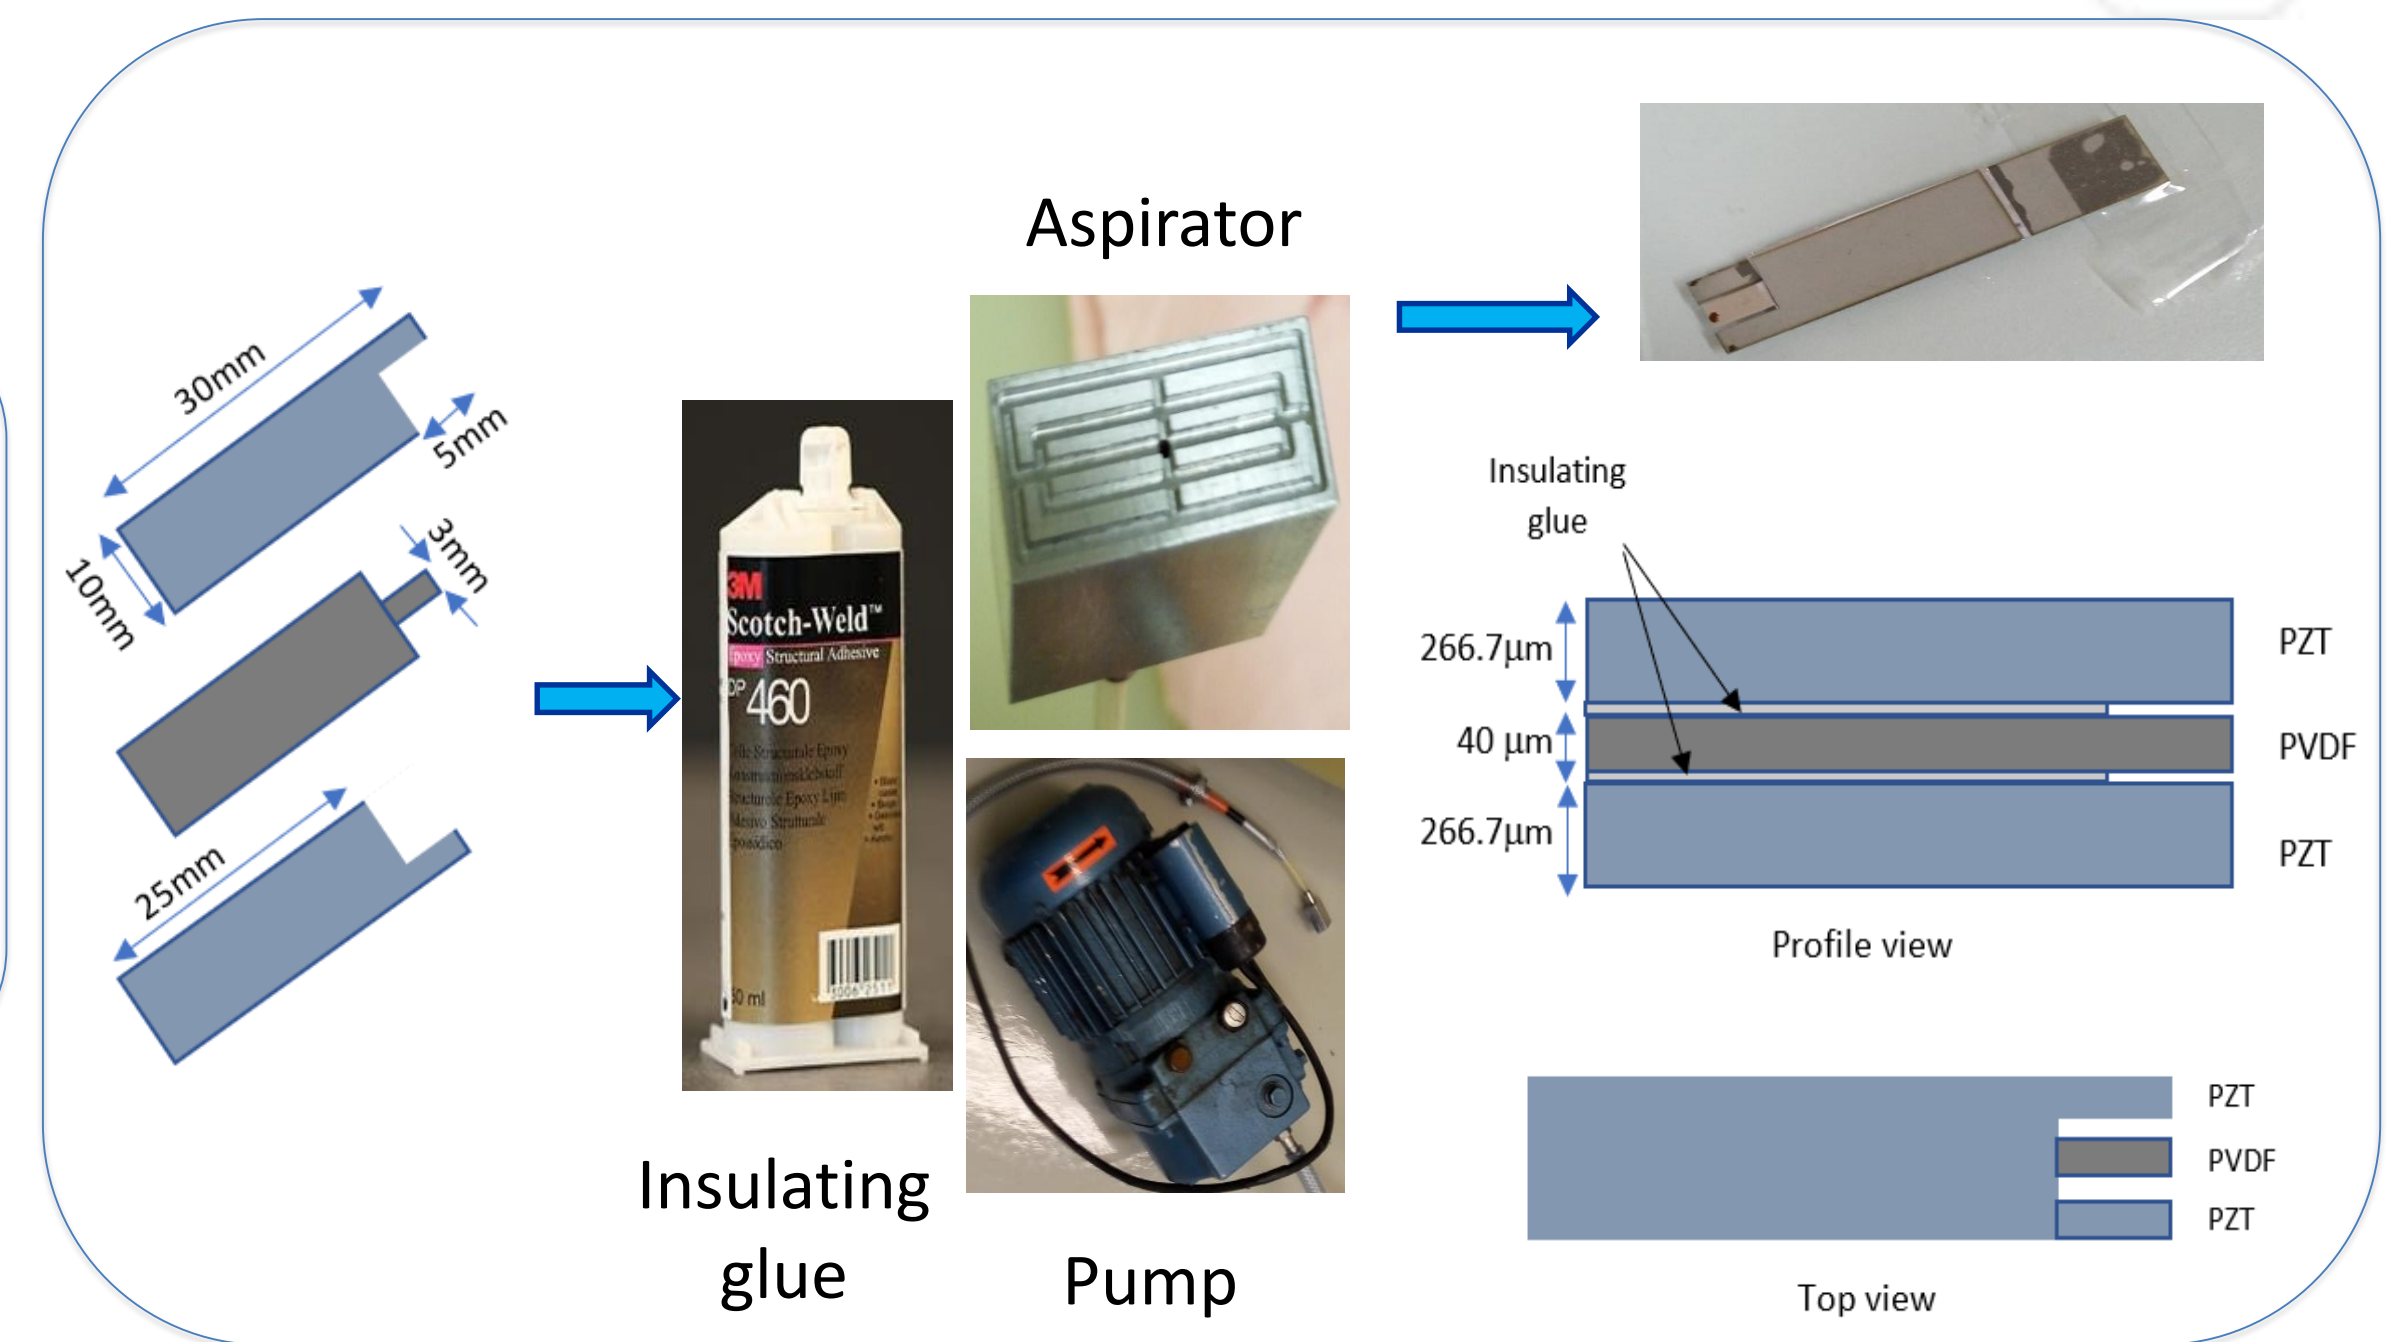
Structure and dimensions of the piezoelectric actuator with collocated sensor.
